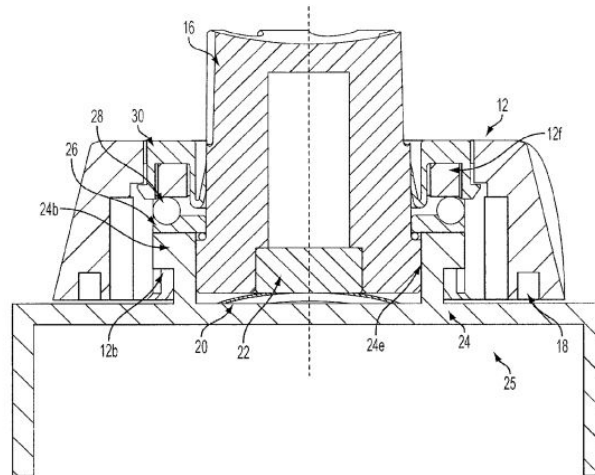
Section showing a detailed design of the patent by T. K. Trudeau et al. [31]
